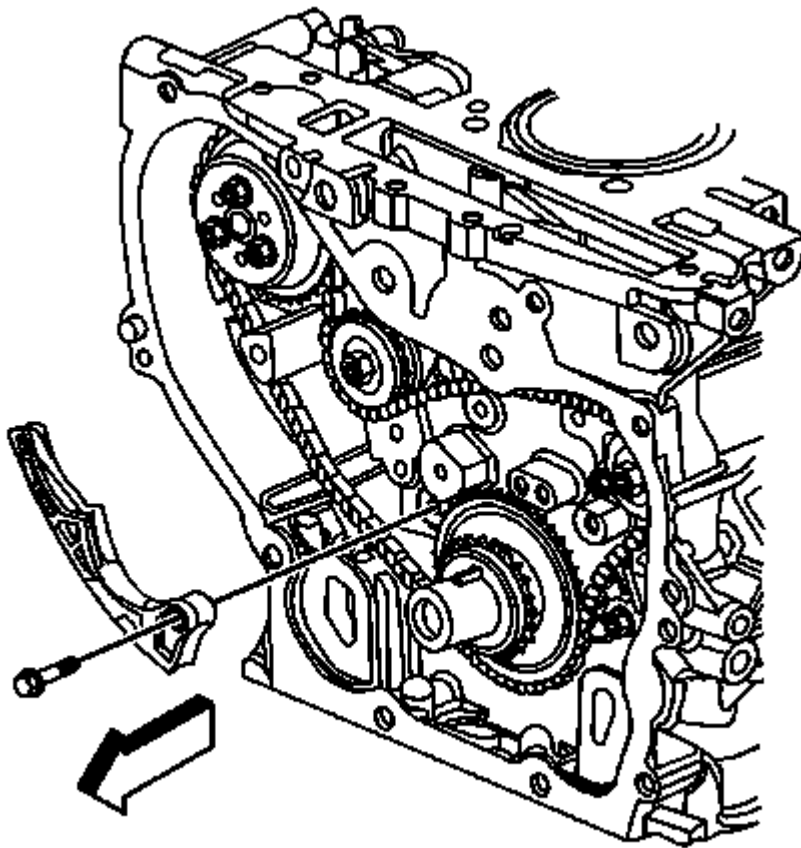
View Of Adjustable Balance Shaft Chain Guide
